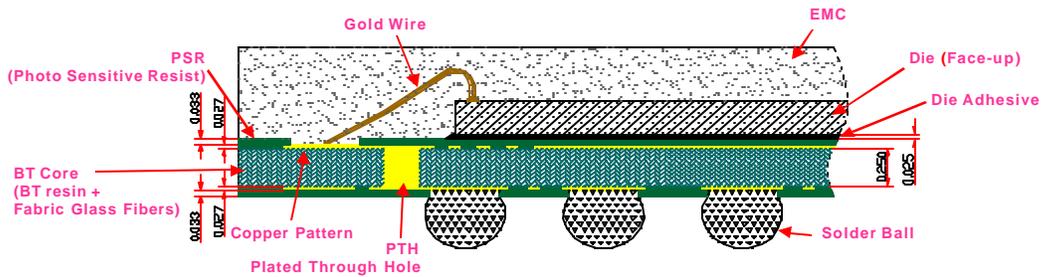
Vertical Structure of a FBGA Package with 2-Layer PCB (courtesy of Samsung)
